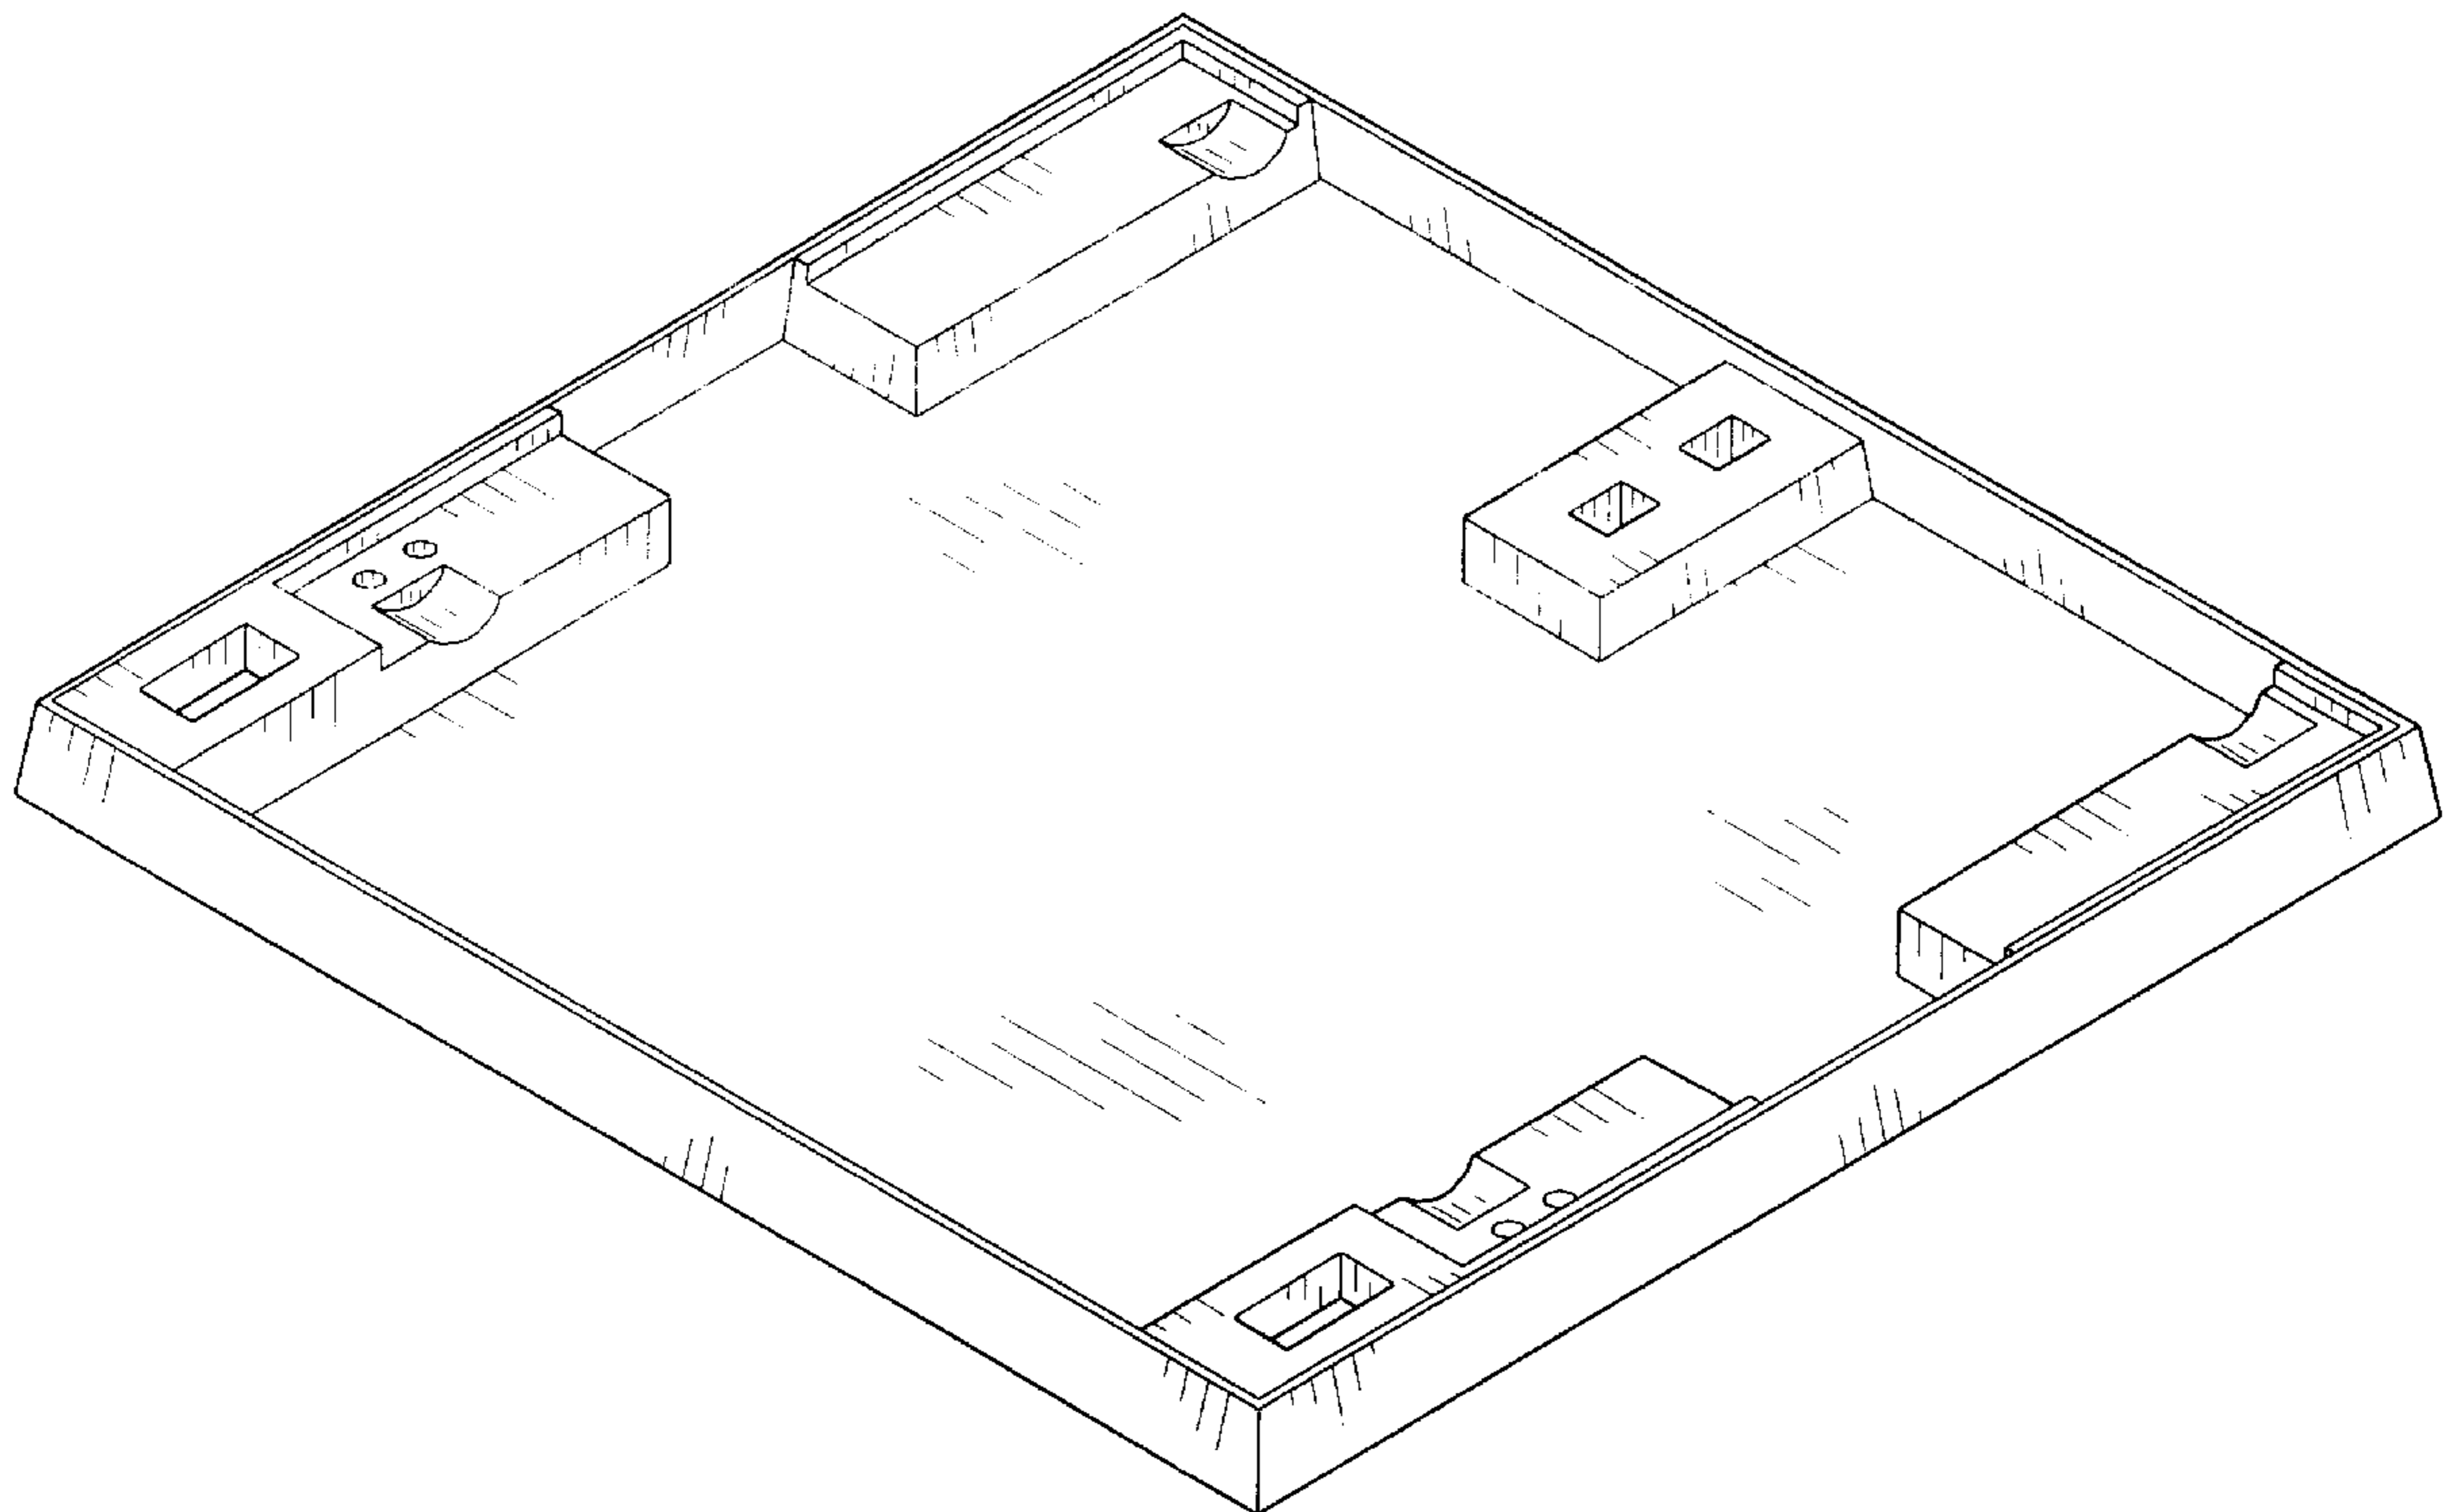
is a top view of the shipping base pad of FIG. 1;
